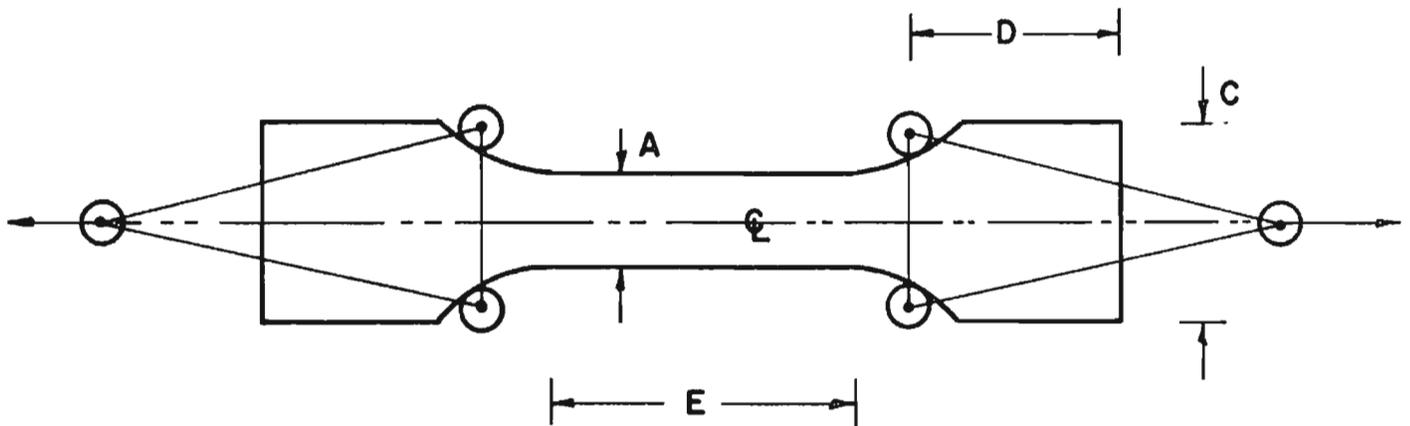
RECOMMENDED TYPE OF TENSILE SPECIMEN
